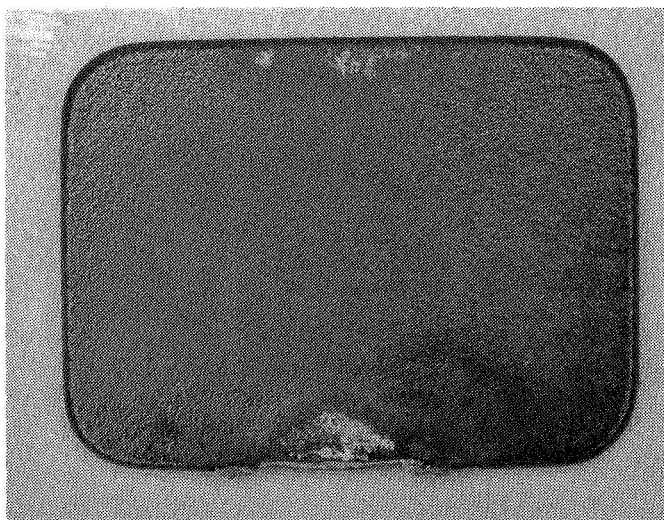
SPECIMENS AFTER CENTER BALL IMPACT; J Coating on 0.030-Inch D43 Alloy.
